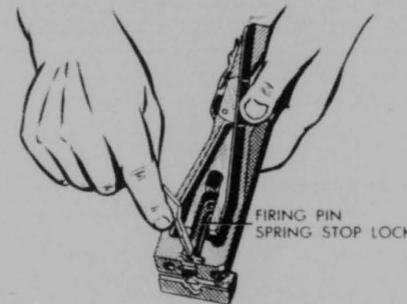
Disengaging Firing Pin Spring Stop Lock.
